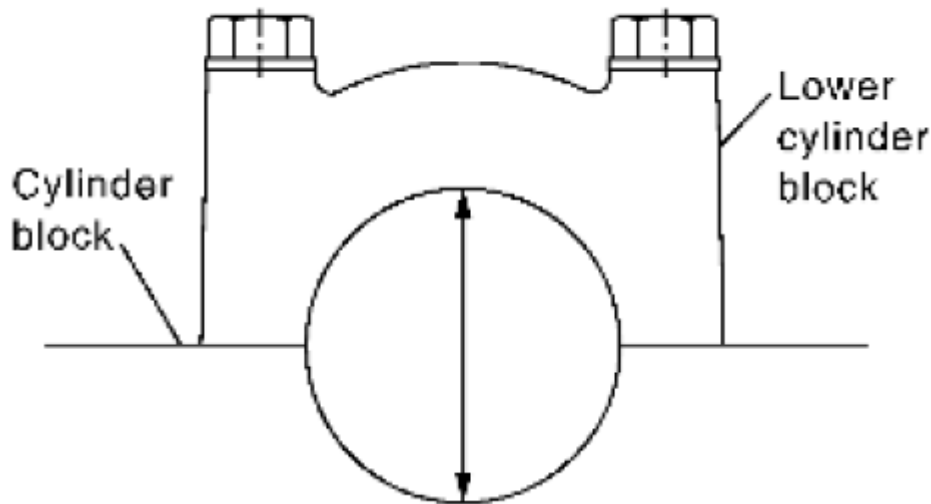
Identifying Main Bearing Housing Inner Diameter
